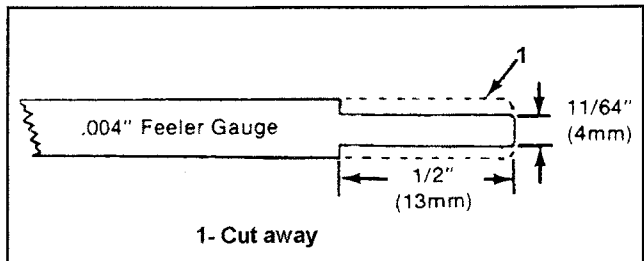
Fabricate a seal installation tool out of an old feeler gauge...
